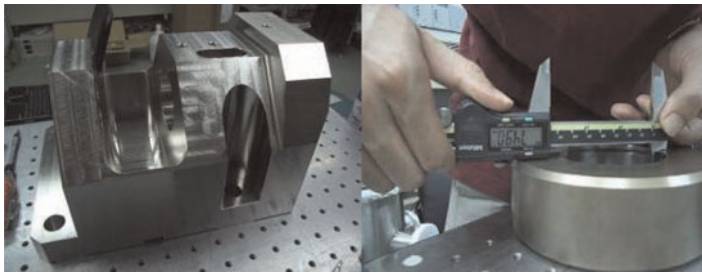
Inspecting the housing and cam of the eccentric cam-mover assembly.
